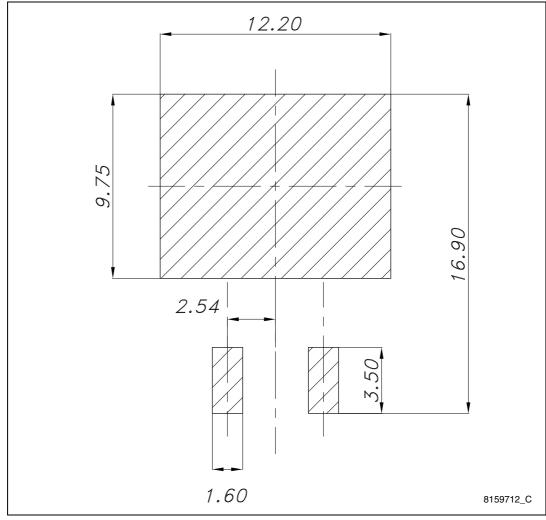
H²PAK-2 recommended footprint (dimensions are in mm)
